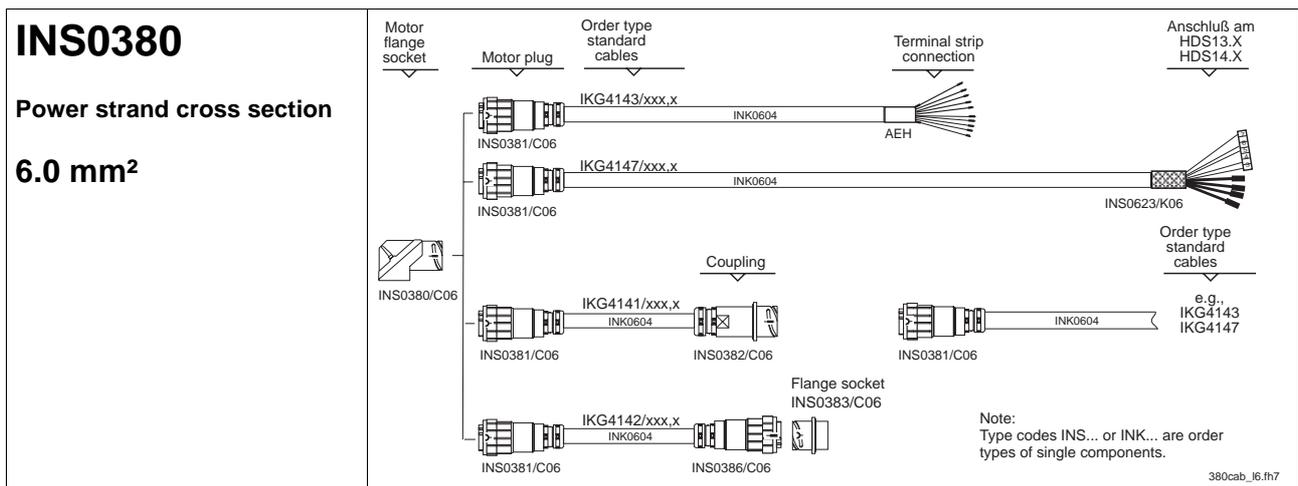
Motor power cable 6.0 mm<sup>2</sup> of flange socket INS0380
